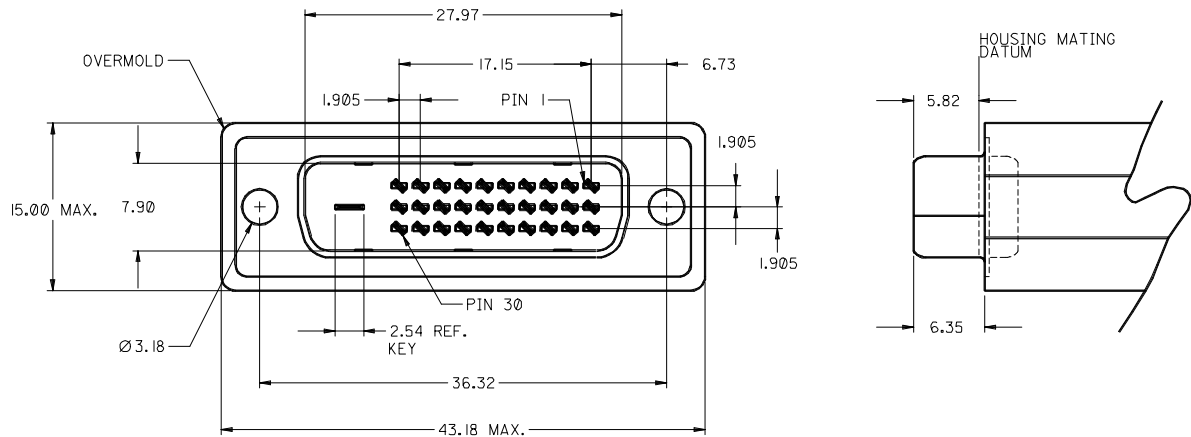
P&D-D Plug Connector - Basic Mating Interface Dimensions
